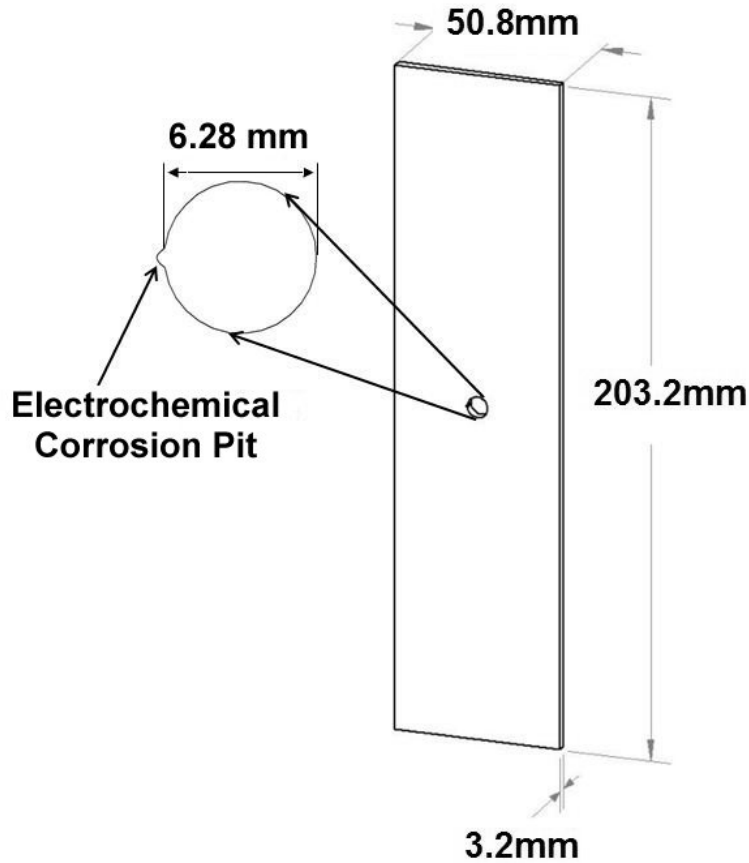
Diagram of the uni-axial test specimen with dimensions. Cut from 7075-T6 Aluminum plate using a water-jet by the AFIT Machine shop.
